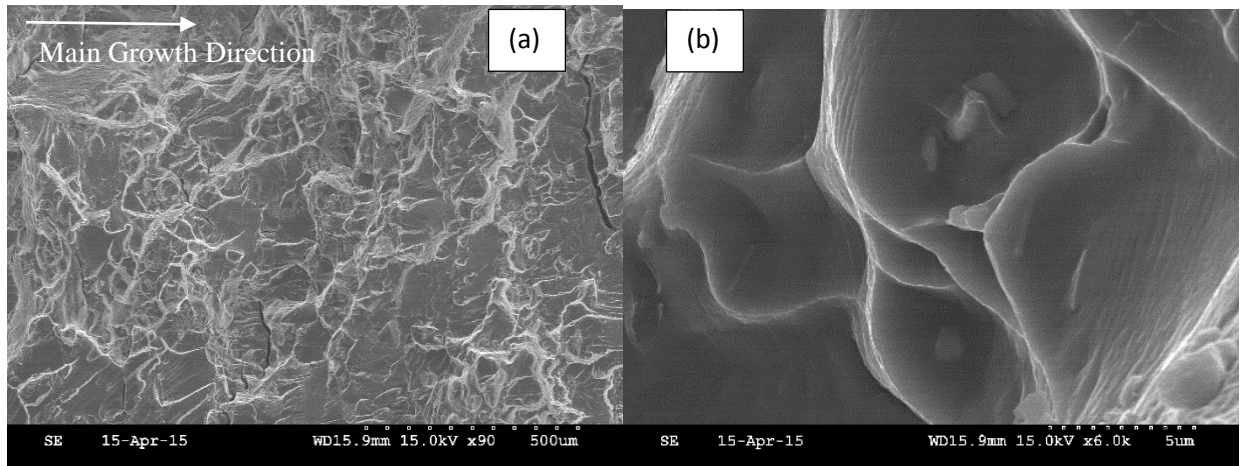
Fractographs of the middle-tension specimen during the second stage of lead crack growth (a) ductile fracture, (b) dimples containing the second phase particles.
